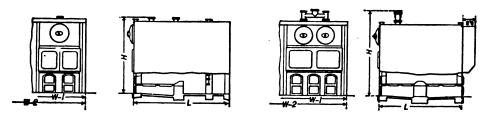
DIMENSIONS OF THE PARKER WATER-TUBE BOILER.
